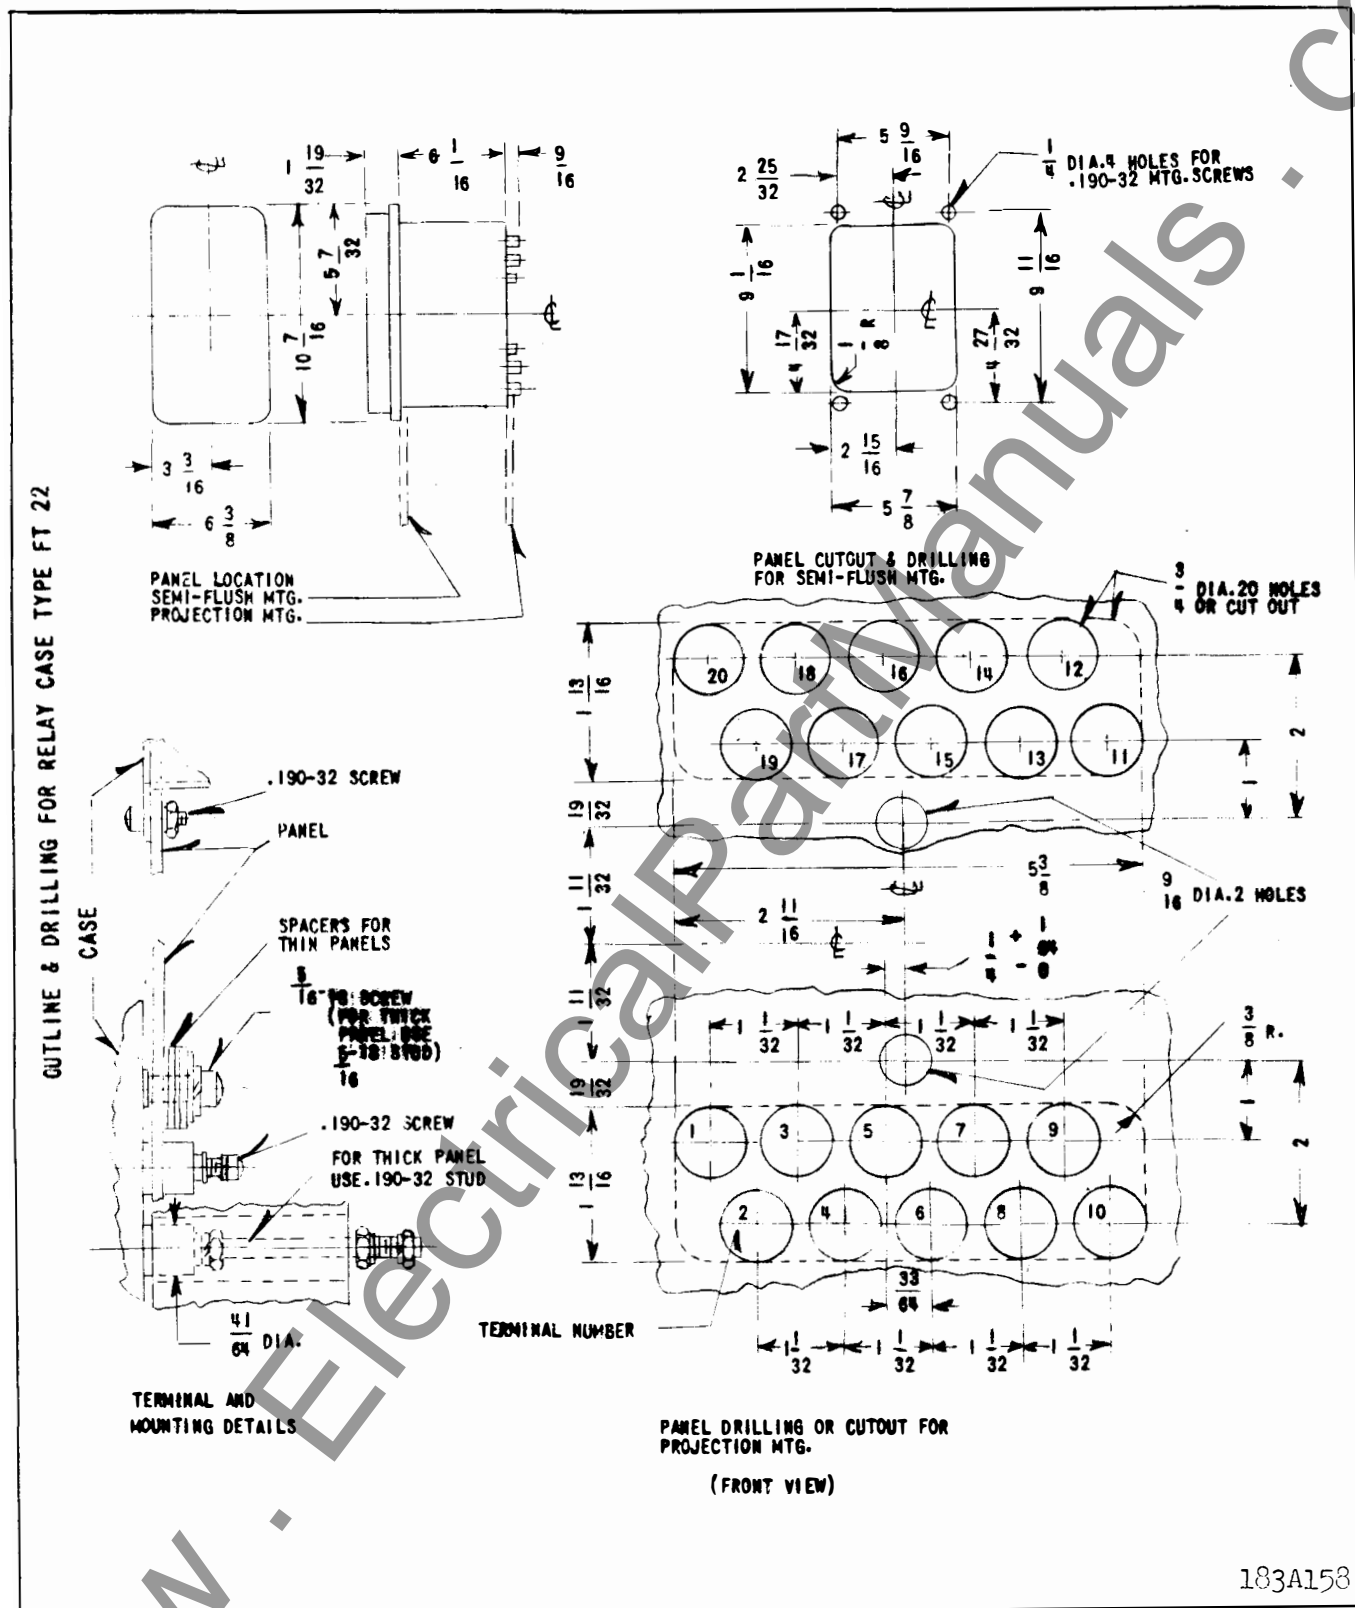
Outline and Drilling plan for the type AR relay in the FT-22 case.
